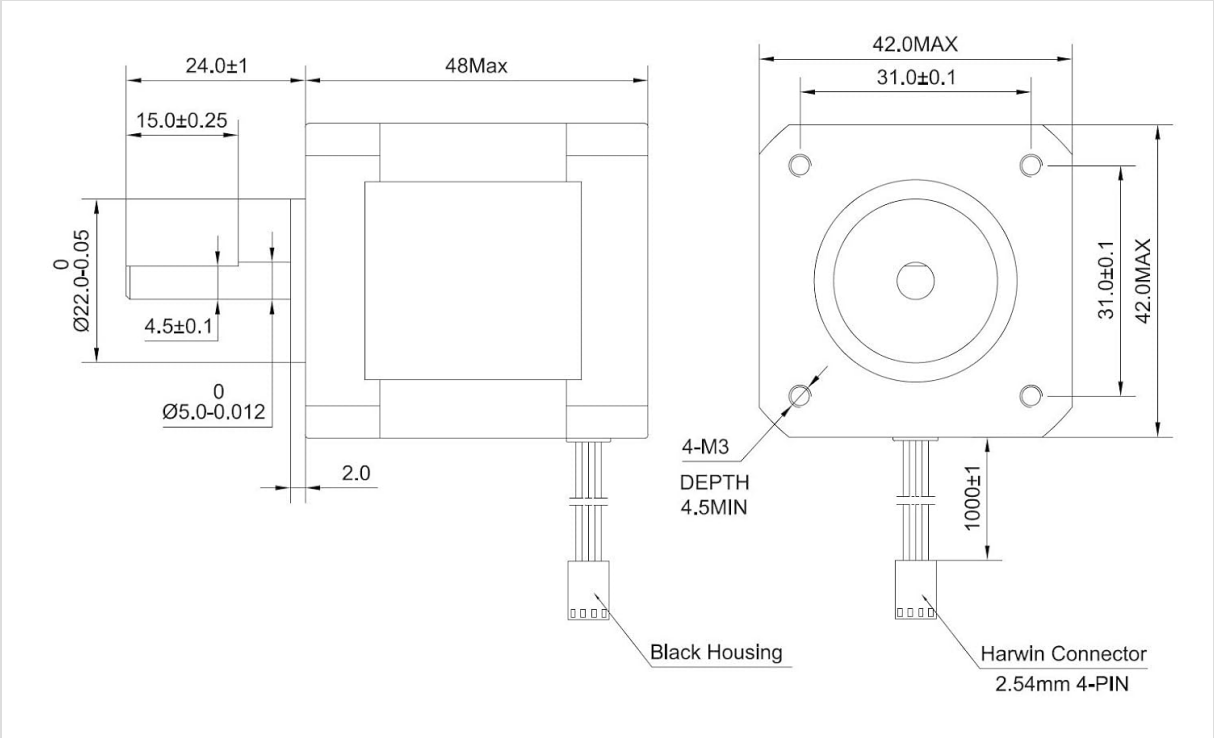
Dimensional drawing showing the motor's physical dimensions and mounting hole pattern.
